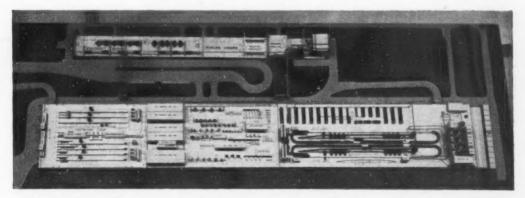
In Planning the Layout of the New Ford Thames Foundry, this Scale Model was Constructed, Showing the Upper Floors of the Main and Auxiliary Buildings and the Arrangement of the Plant
